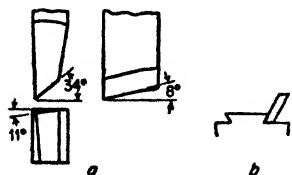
Tool No. 11. (a) Right-hand dovetail end-cutting roughing tool for cast iron; (b) Application of the tool. (*The G. A. Gray Company*)
